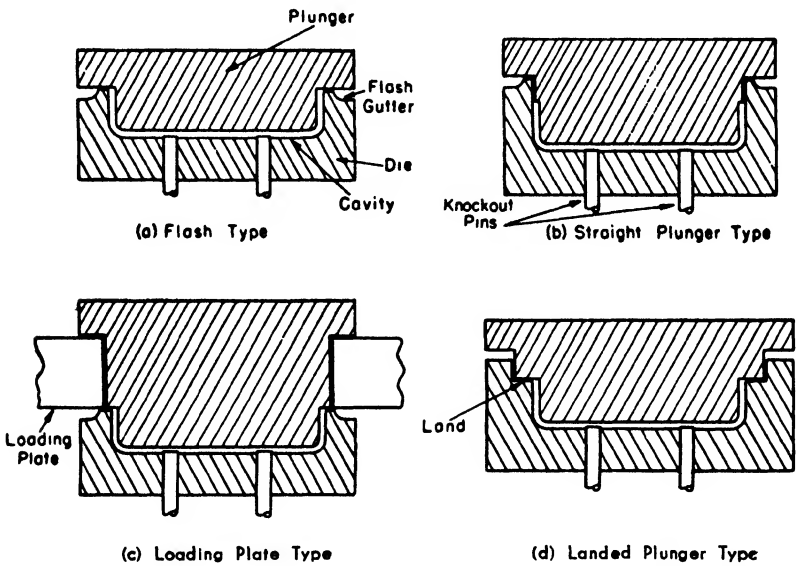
Sketches illustrating the common designs of compression molds.
